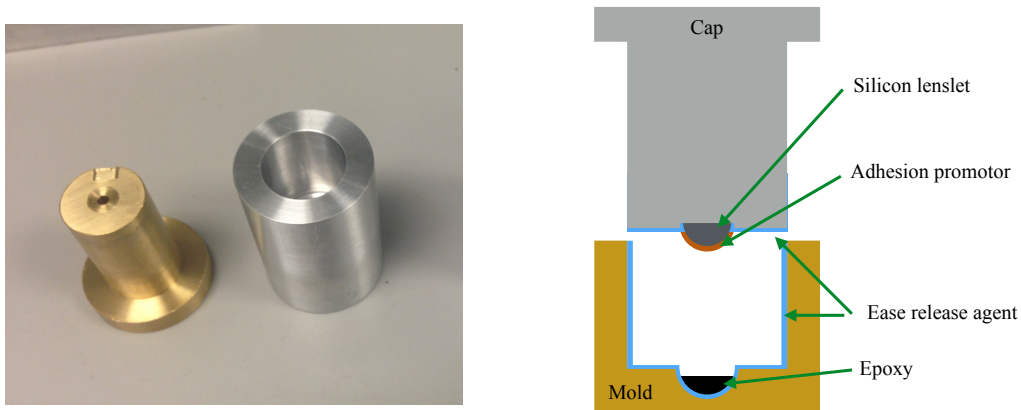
The prototype mold. Left: photograph of a prototype mold. Right: A diagram showing the operation of the prototype mold. First, the ease release agent is applied to prevent Stycast sticking to the mold. The lenslet is in the pocket in the cap and an adhesion promotor is applied. Stycast is then dispensed into the mold. Finally, the cap and the mold are assembled.
